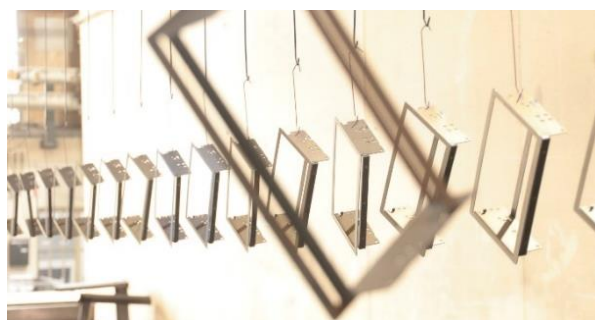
Parts with powder coating on their way towards an industrial curing oven.
